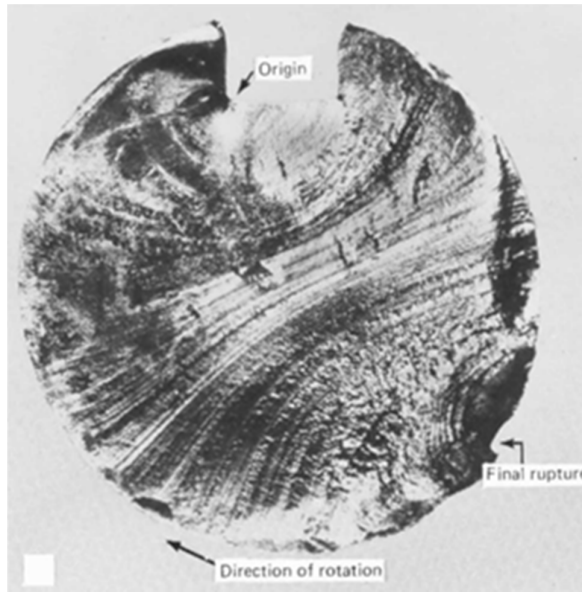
Fracture surface of a rotating steel shaft that experienced fatigue failure. Beach-mark ridges are visible in the photograph [6].
